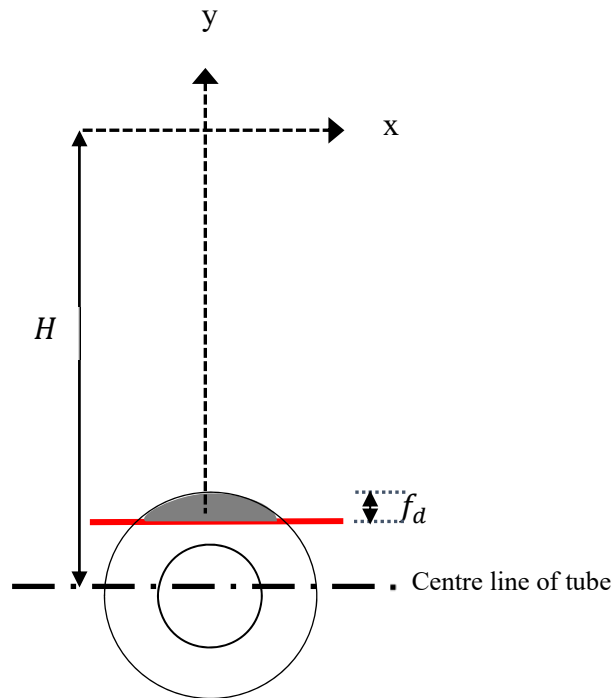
Schematic showing the modelling of a flat line flawed tube - cross-section.
